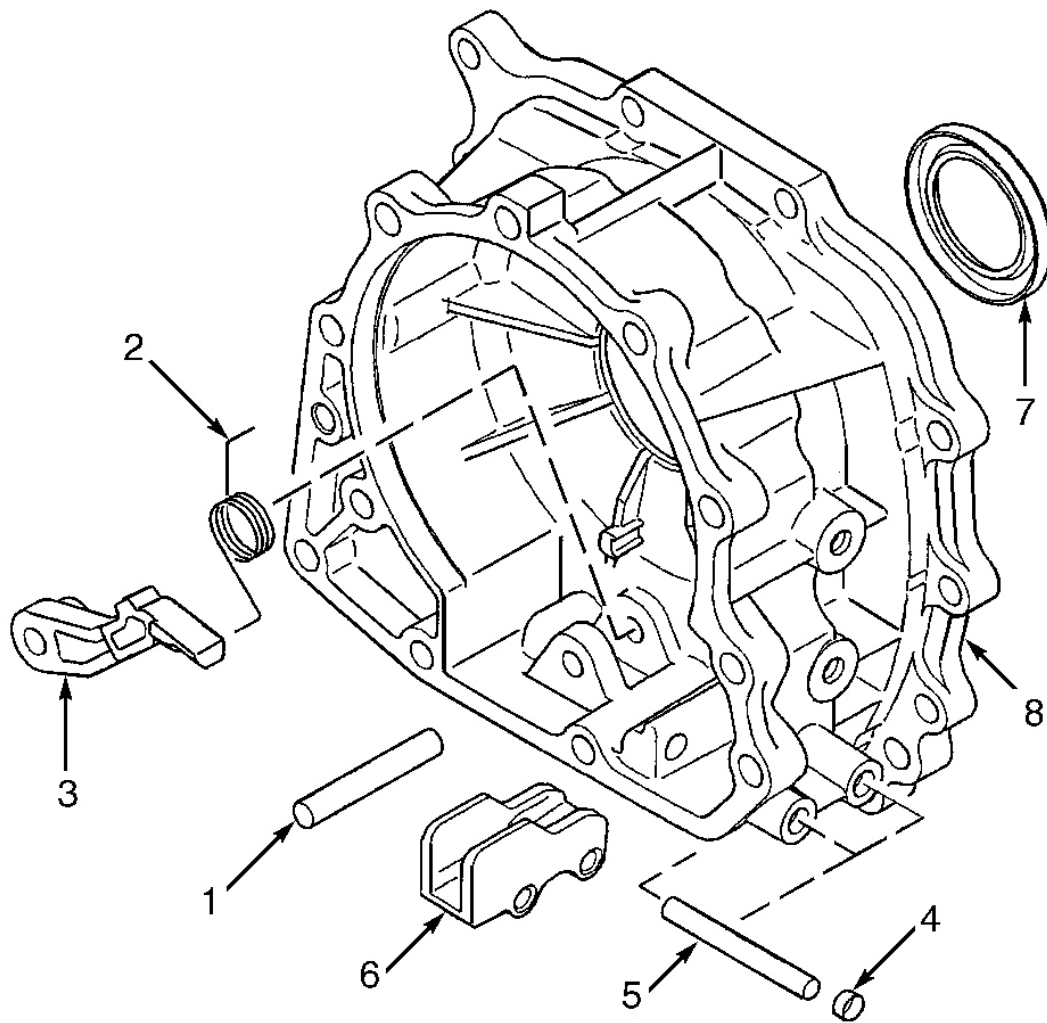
Exploded View Of Tailshaft Housing (R4A51)
